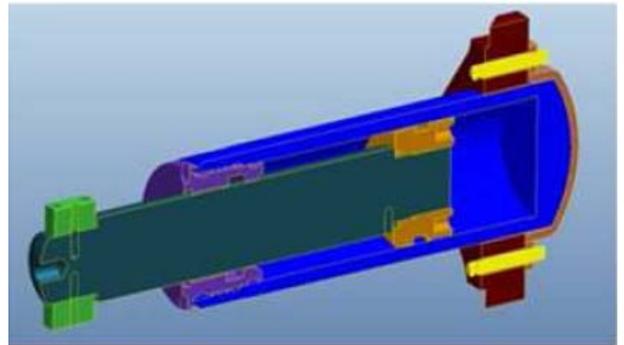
A sectional view of Hydraulic Cylinder Pro Engineer Model.
